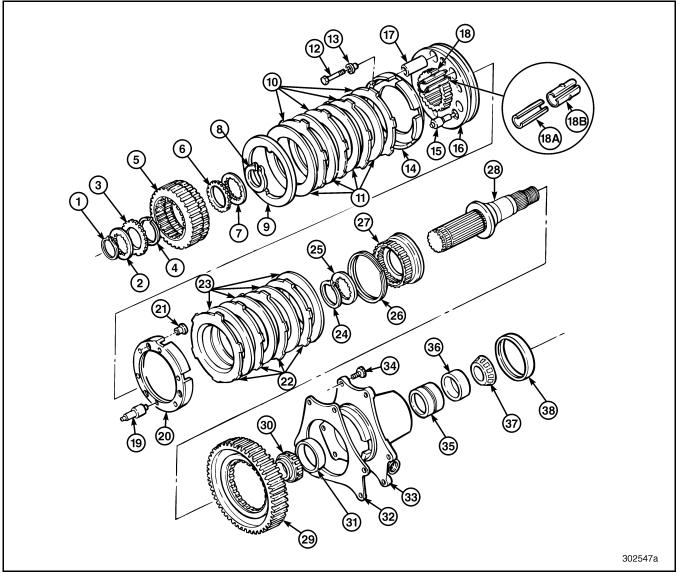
Exploded View of: T313–T318(L)(LR) Rear Mainshaft and Synchronizer Assembly
